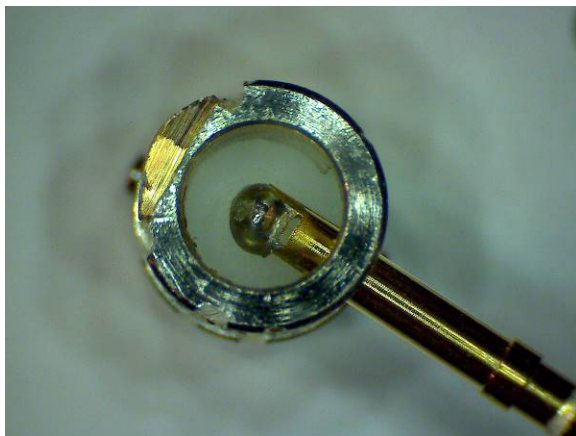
~ End view of Adapter 3 female part with the end-cap removed. The soldered center contact can be seen in the middle of the barrel (it is slightly out of alignment from the cutting and disassembly operation). The male contact is in the lower-right of this image; it extends through a round hole into the female barrel. During assembly the two contacts are soldered before the end-cap is press-fitted. Image © 2019 W. Reeve
